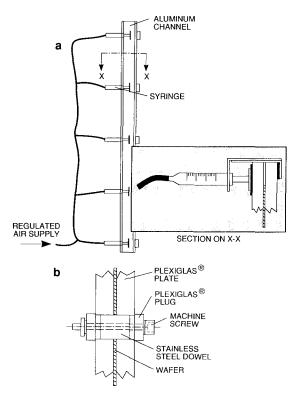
Details of: (a) the air clamping system, and (b) dowel assemblies.
